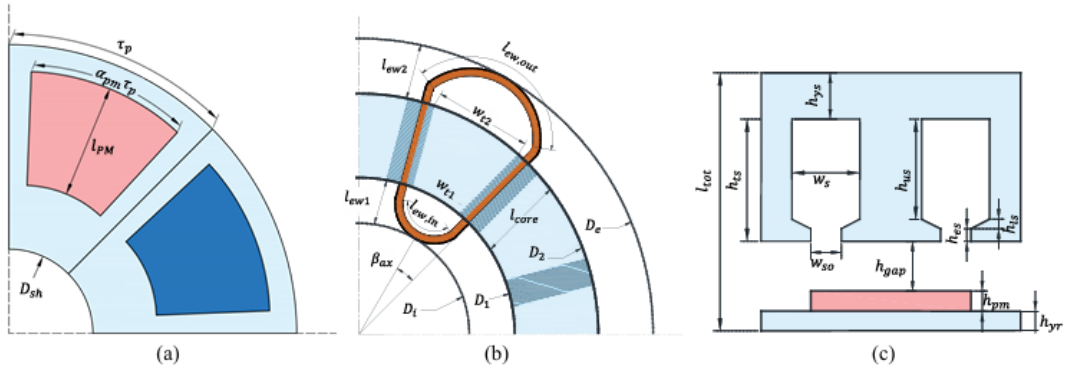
Main AF motor dimensions: (a) rotor structure, (b) stator and winding coils, (c) axial view with core, slot, and magnet dimension [1].
